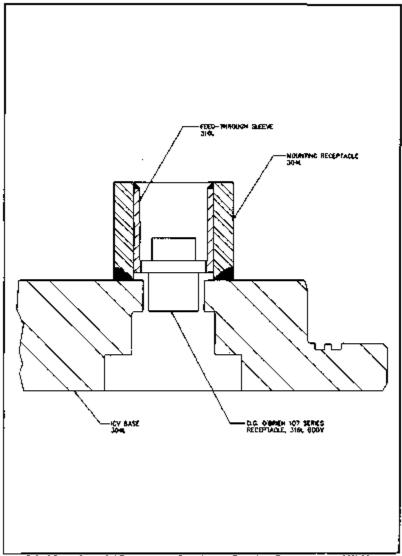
ICV Feed-through Containment Boundary Components and Welds.
